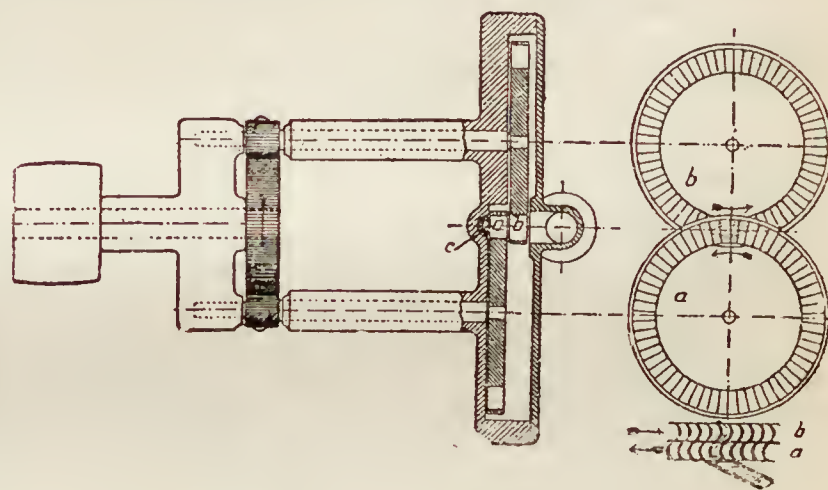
DETAILS OF THE SEGER TURBINE.
